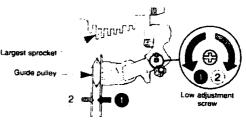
Adjust the low limit screw so the guide pulley aligns under the largest cog.
